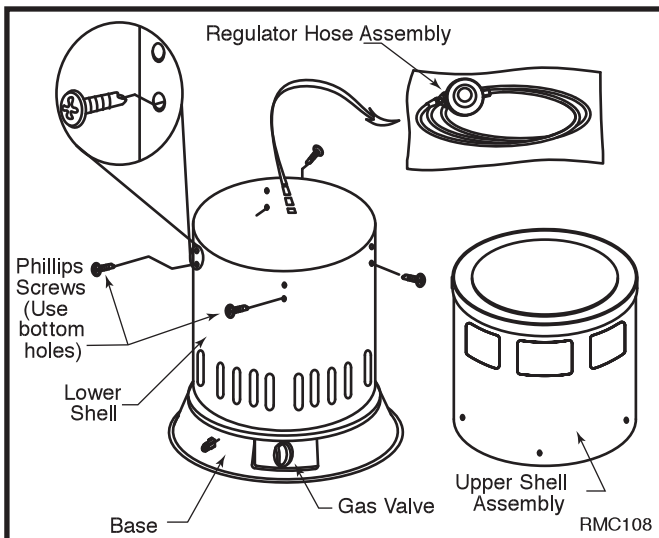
Remove regulator hose assembly, place four screws in bottom holes at top of lower shell.
